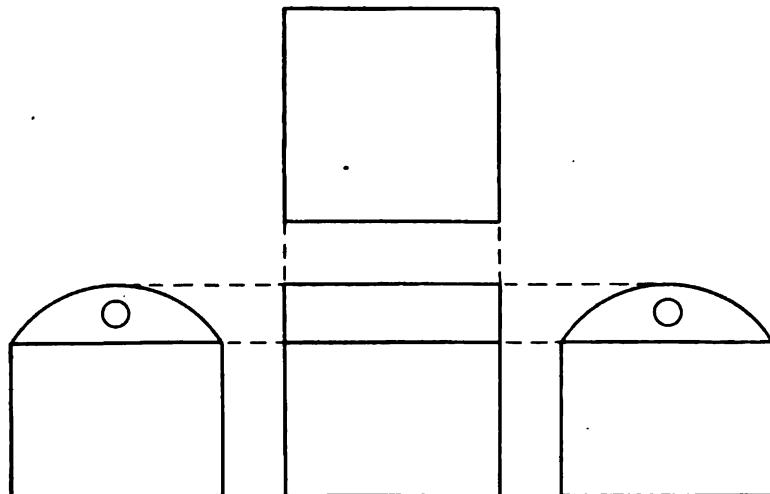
Plan, Elevation, and End Views of a Box with a Curved Top
